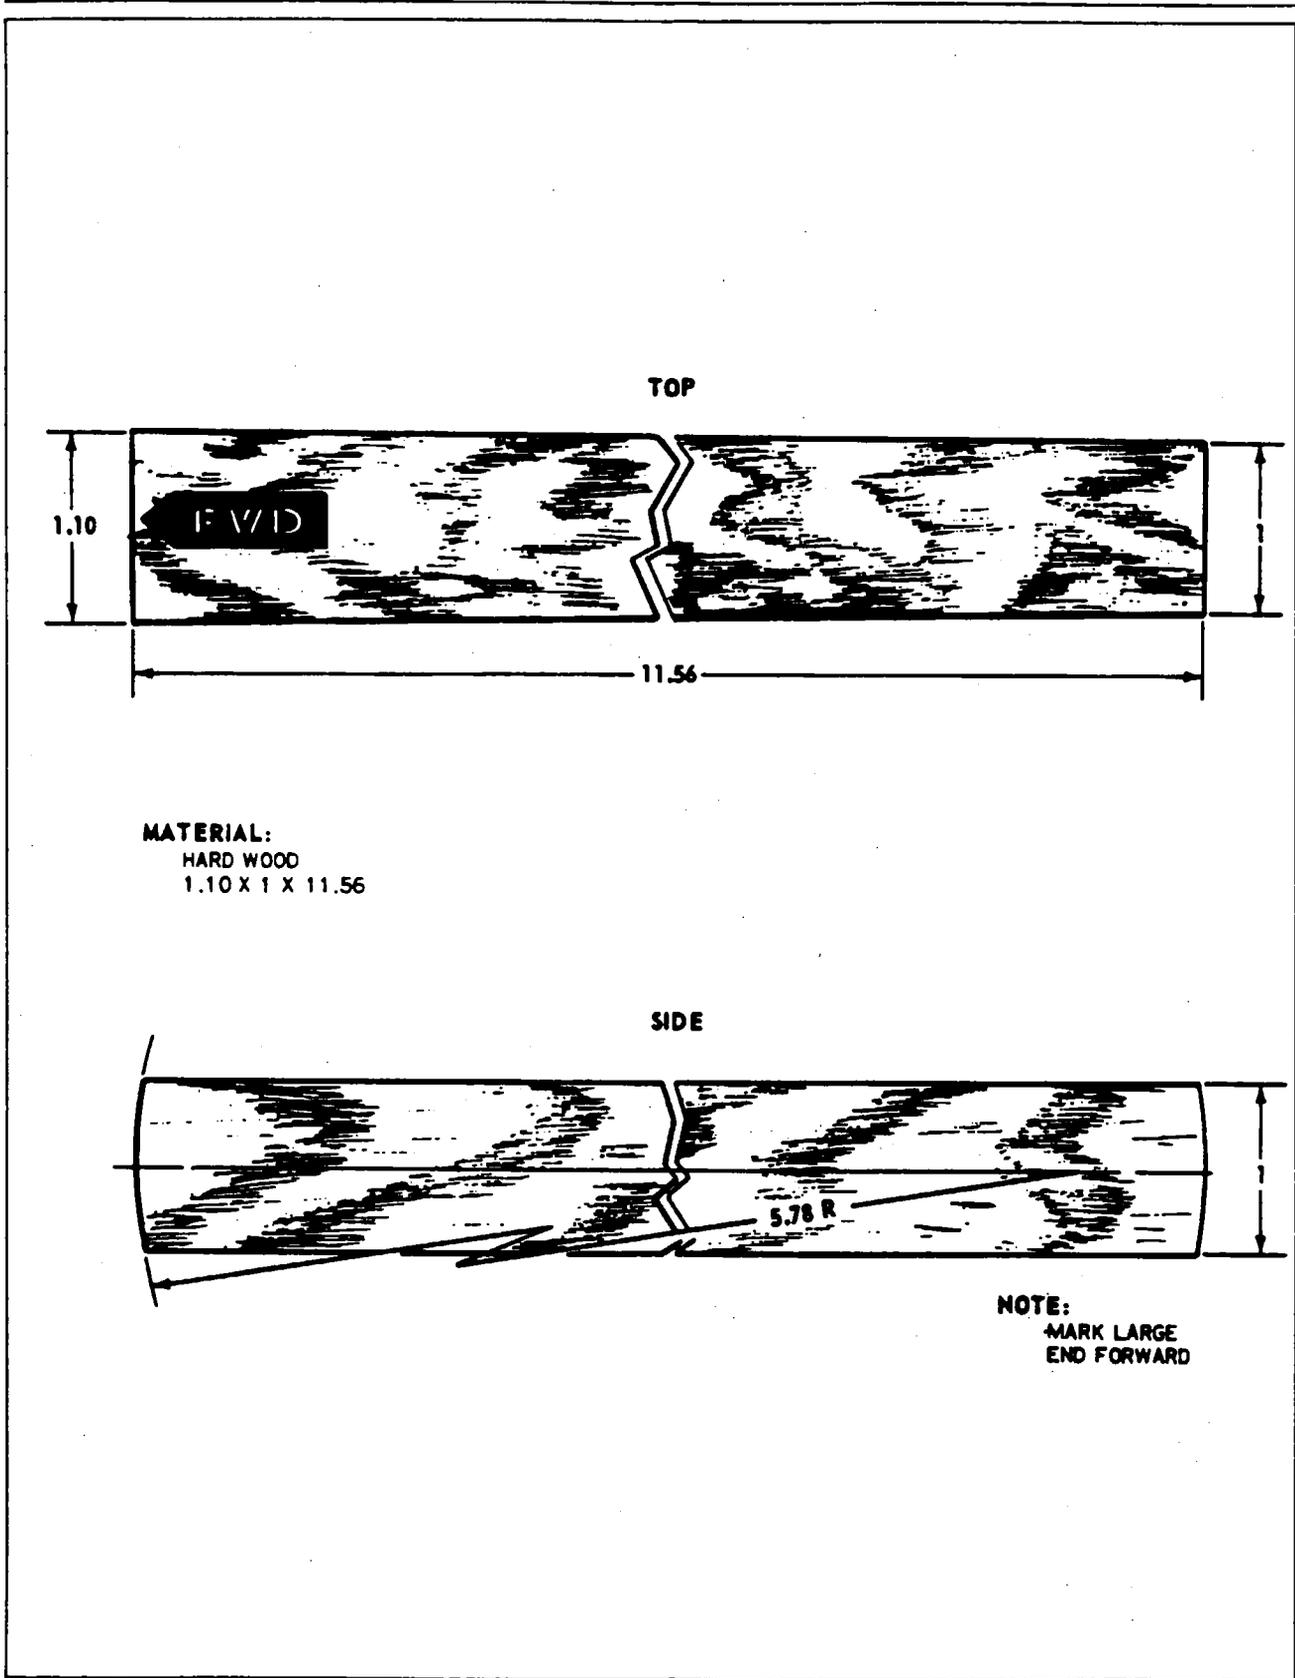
Fabricated Tool, Main Gear Toe-In Adjustment
